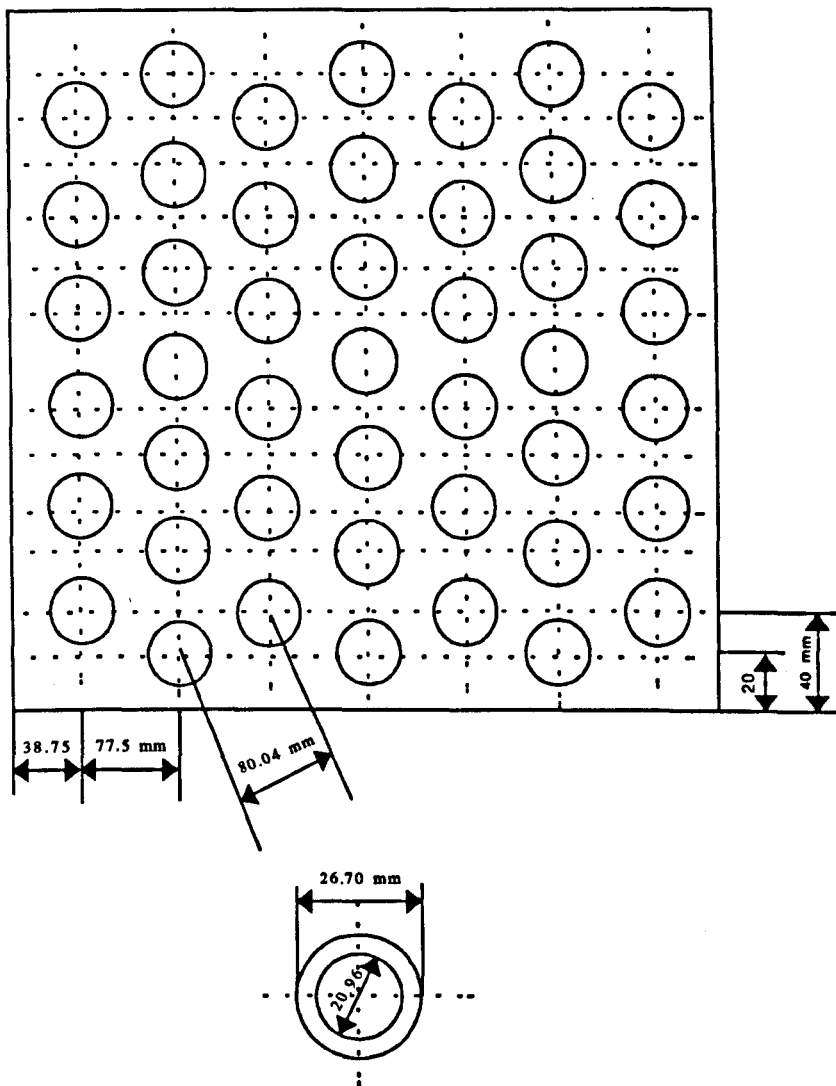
(a) Staggered Tube Bundle and Tube Dimensions
